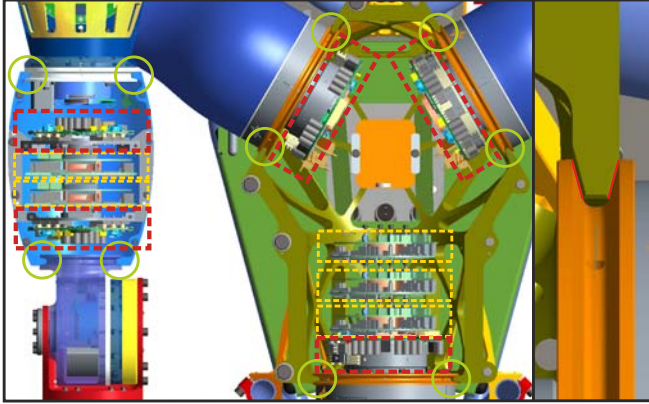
Wedge mechanism and electronics placing. Motor power-electronics are marked by red rectangles, power supply, joint and motor controller by yellow rectangles. Green circles mark the clamping wedges. Right: detail view of the wedge mechanism. Red marks denote the clamping grooves.
